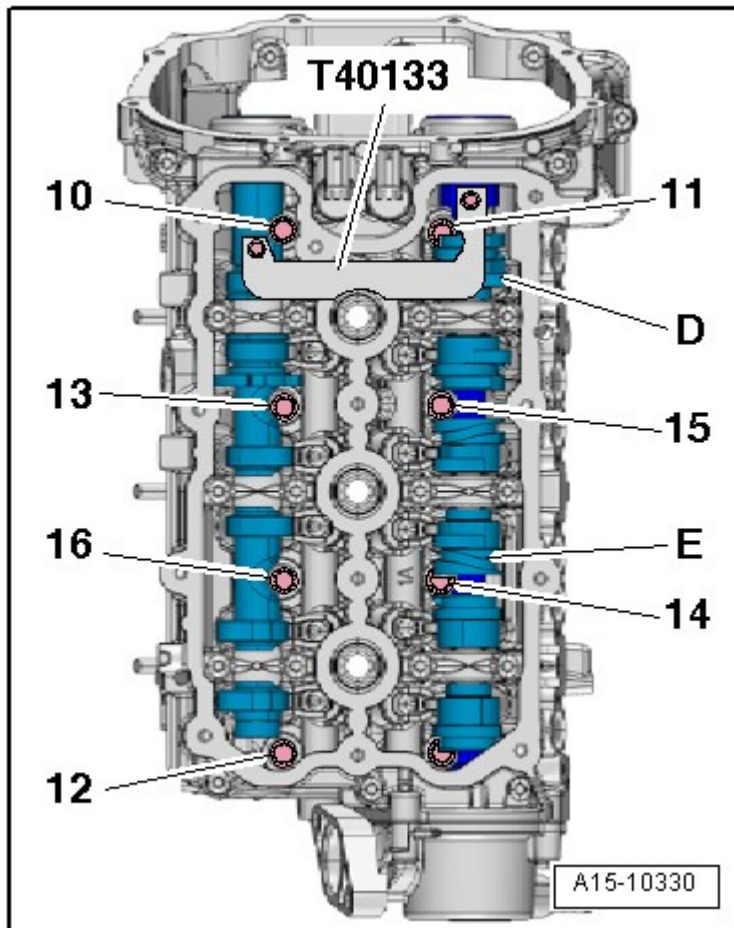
Identifying Bolts -10 Through 16- And Unloaded Camshaft Sliders -D- & -E-
